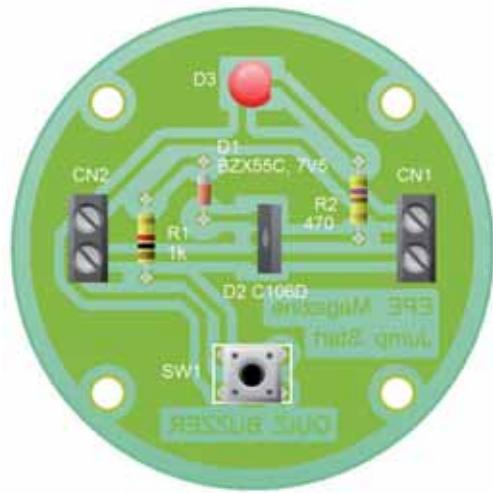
Quiz Machine* contestant unit printed circuit board (PCB) component layout and copper track artwork
